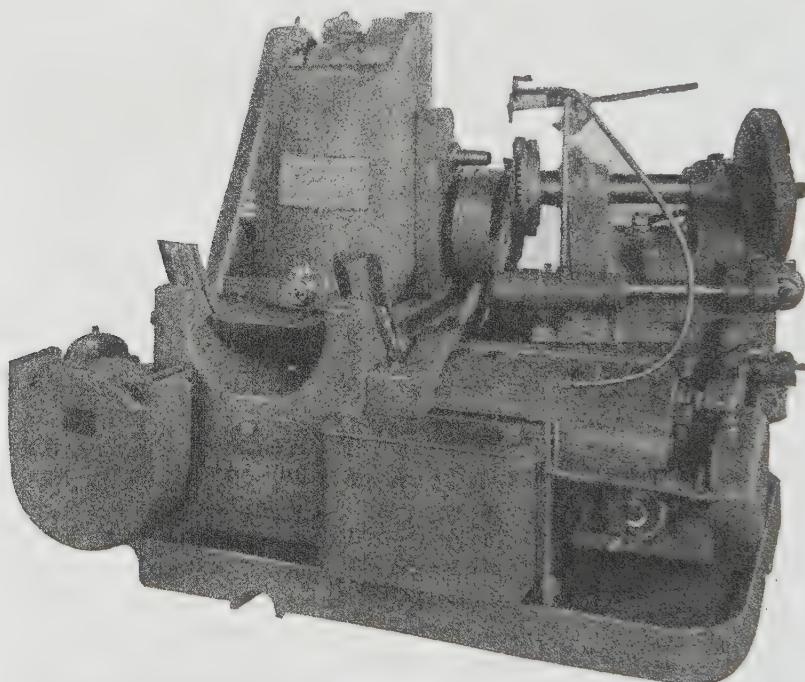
GLEASON AUTOMATIC HELICAL BEVEL GEAR GENERATING MACHINE.
